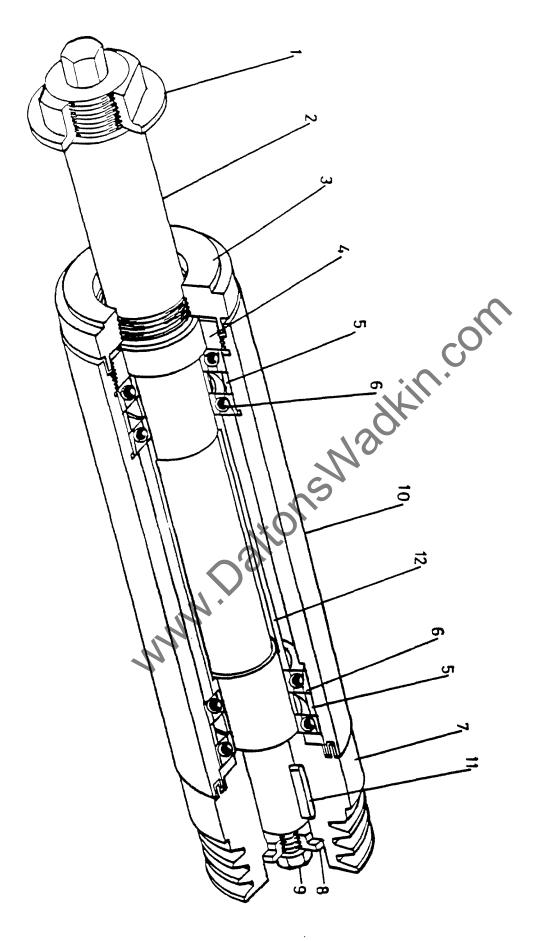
NEAR SIDE HEAD SPINDLE UNIT
